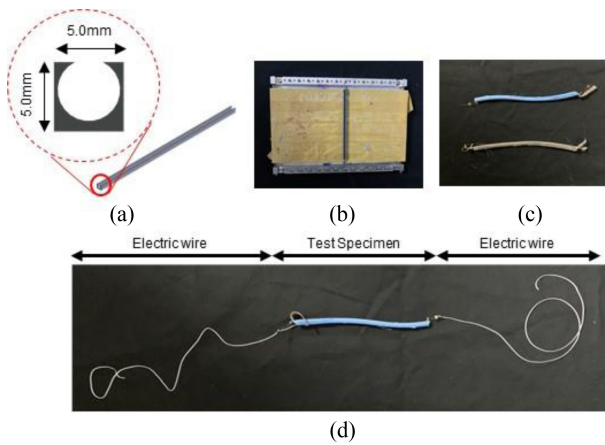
Manufacturing process of the soft actuator, (a) Mold modeled by 3D CAD tool, (b) Positioning conductive fabric and SMA before pouring polymer, (c) Completed specimen, and (d) Electric wire connection to the actuator
